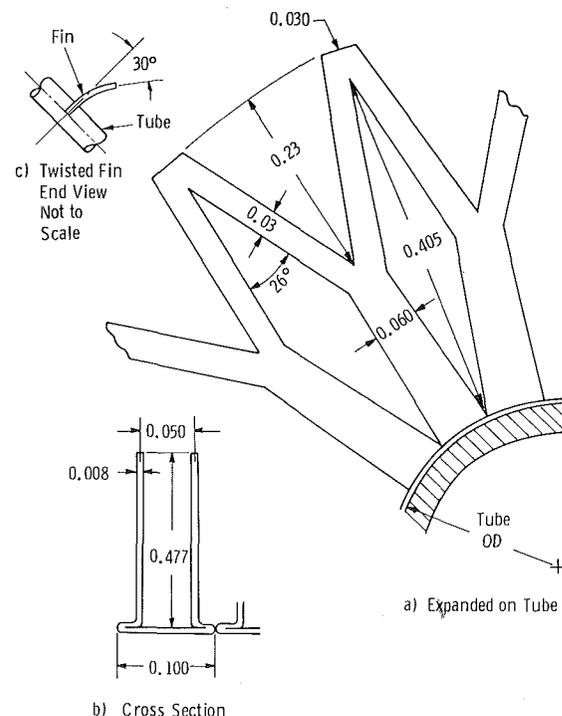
The K-Y heat transfer surface (all dimensions in inches)
